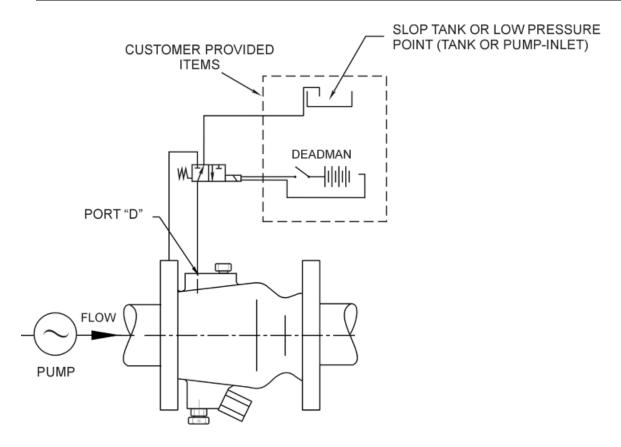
64110A(B)2 FUEL SET PRESSURE CONTROL VALVE
